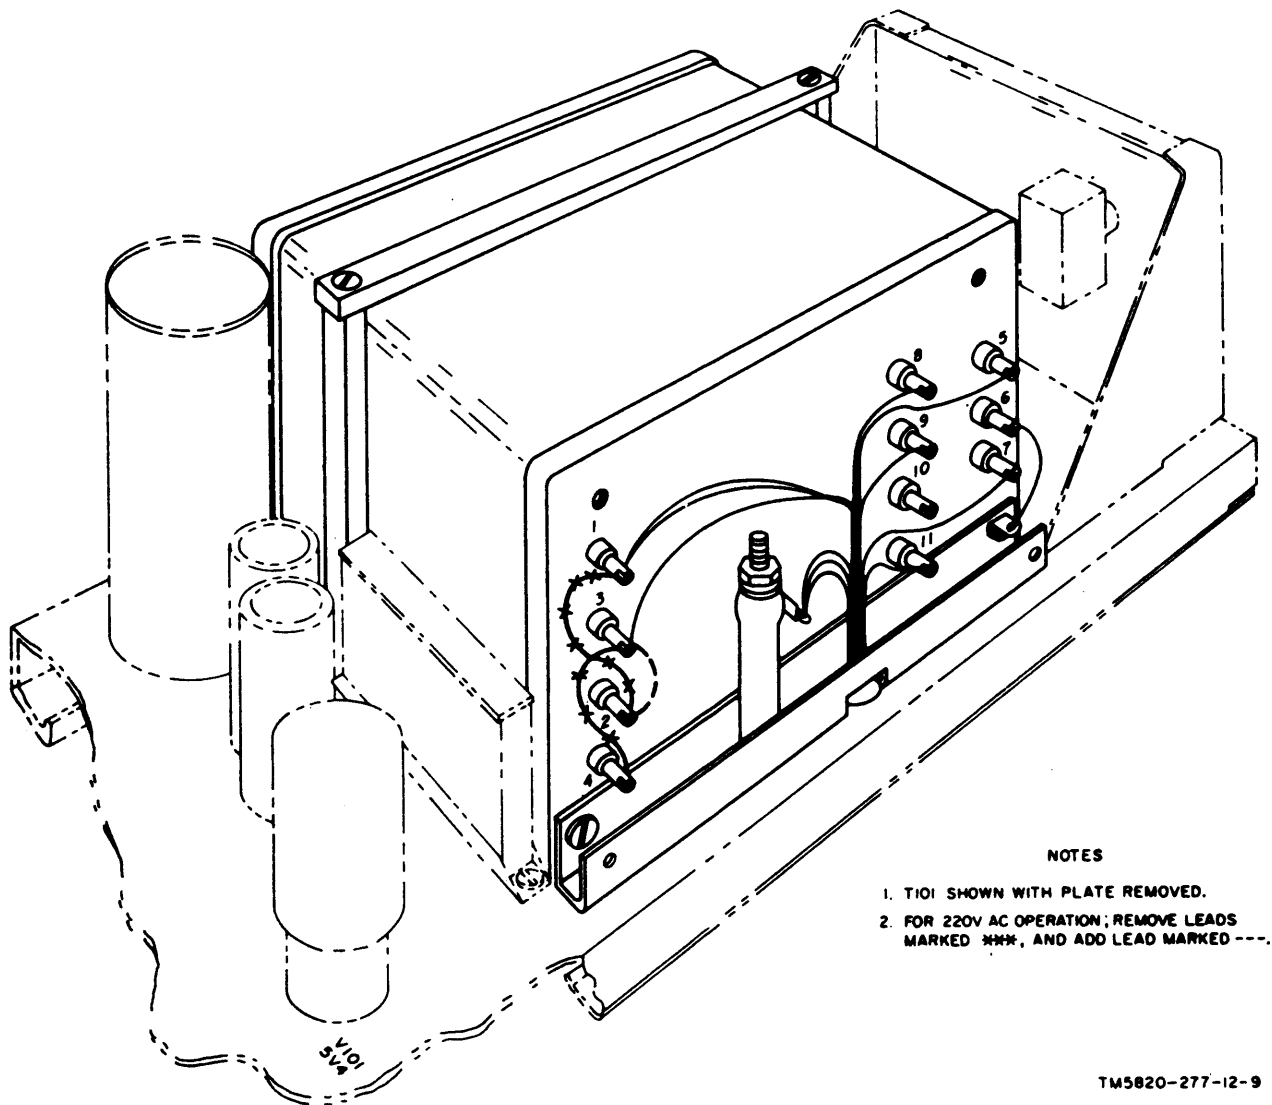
O-330B/FR, primary power conversion connections, power supply transformer.
